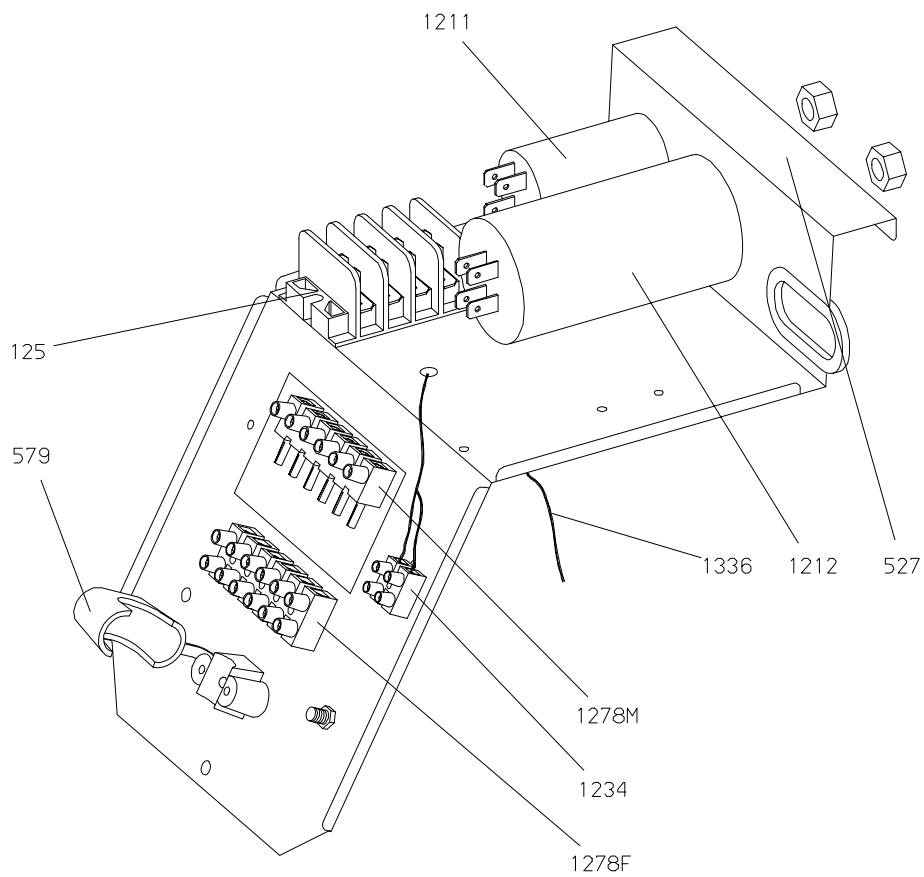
ELECTRICAL ASSEMBLY- CUE85,90,100
